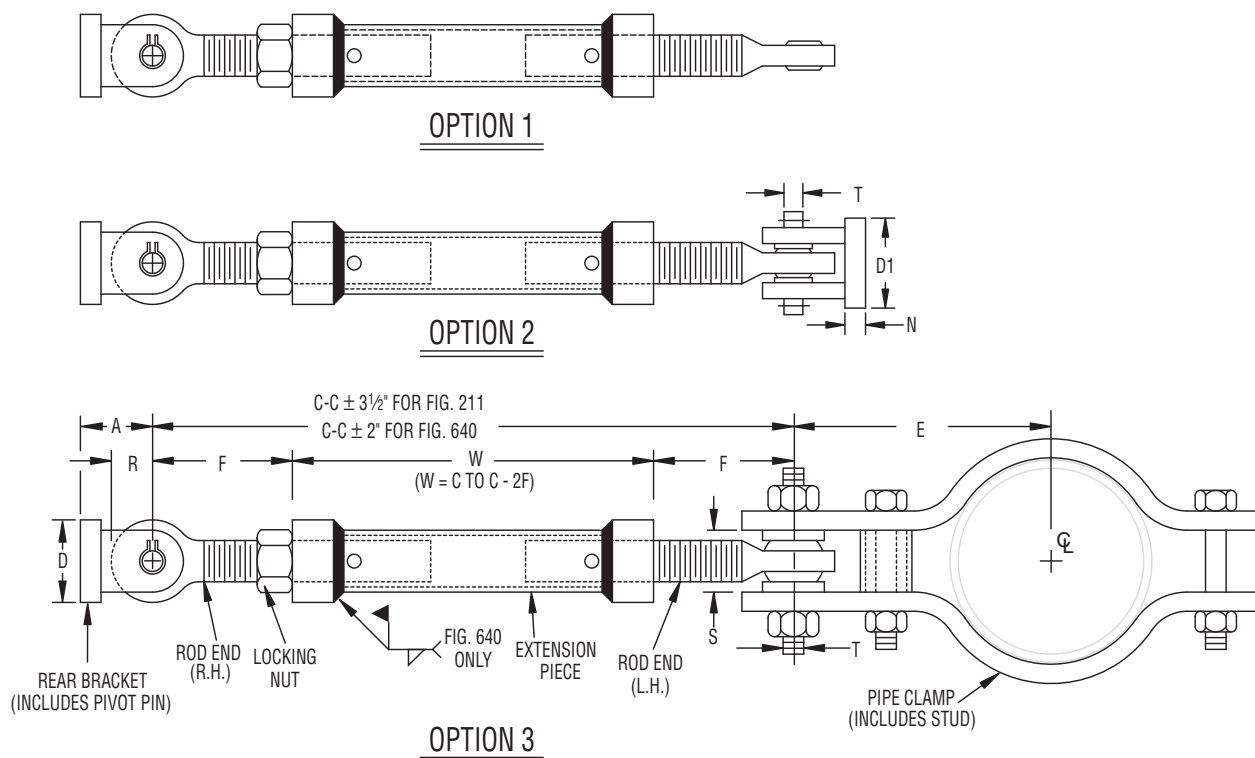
, C-211, Fig. 640 & Fig. C-640: Load (lbs) • Dimensions (in)
